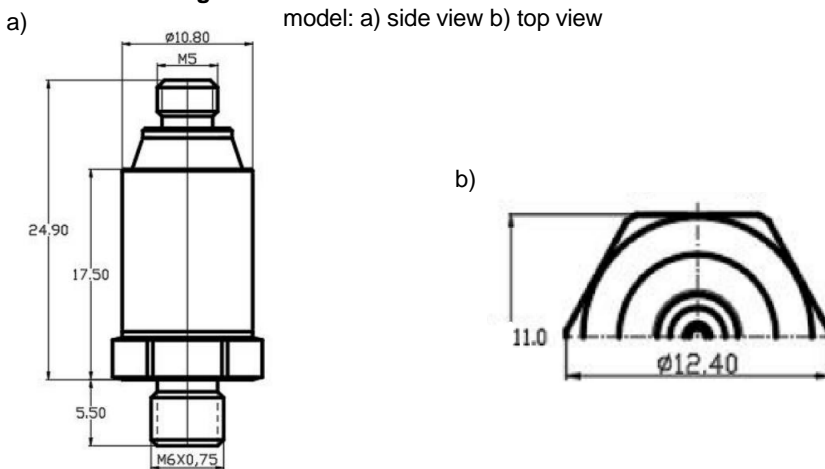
Mechanical Dimensions of SSA-P8HIA model: a) side view b) top view
